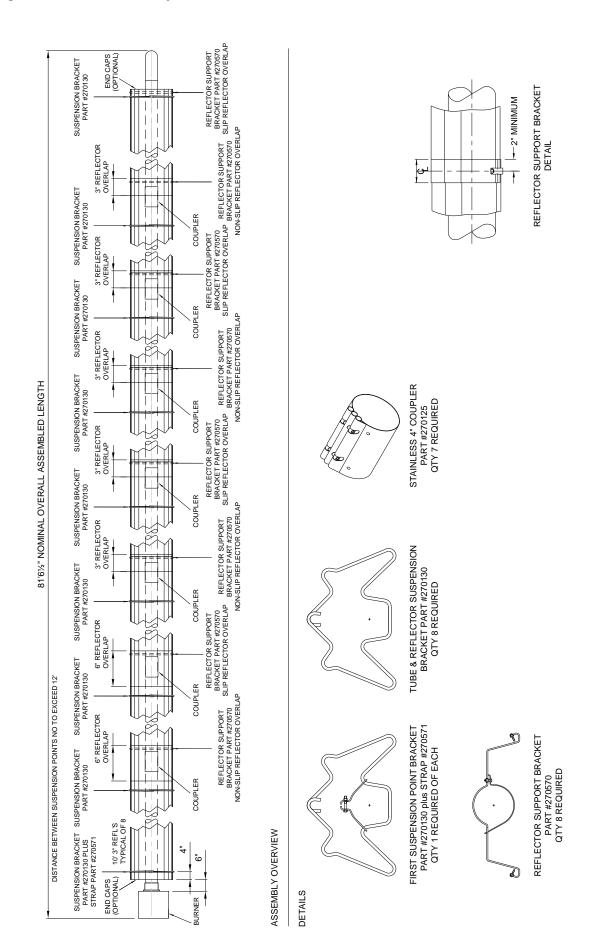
Heater Assembly: Model U tube VCS 60-U20, VCS 80-U20 VCT 60-U20
